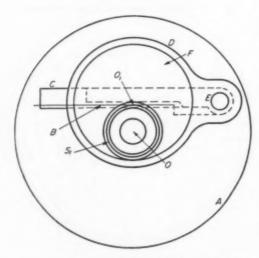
Fixed eccentric and sliding-rack control mechanism.
